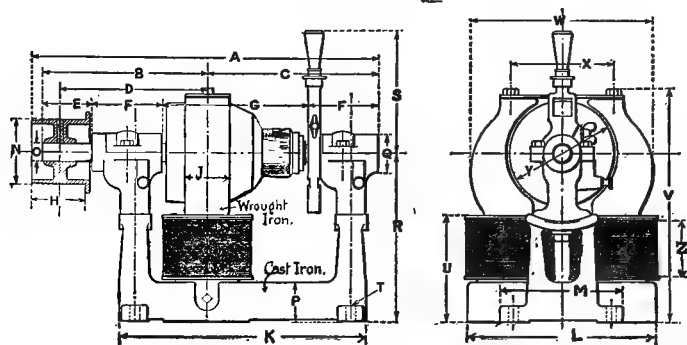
Crocker-Wheeler Bipolar Motor.
